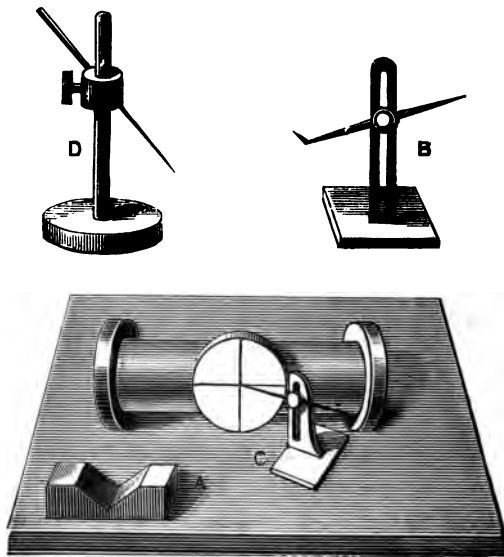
MARKING CYLINDER: SURFACE PLATE, SCRIBERS, AND V BLOCK.
